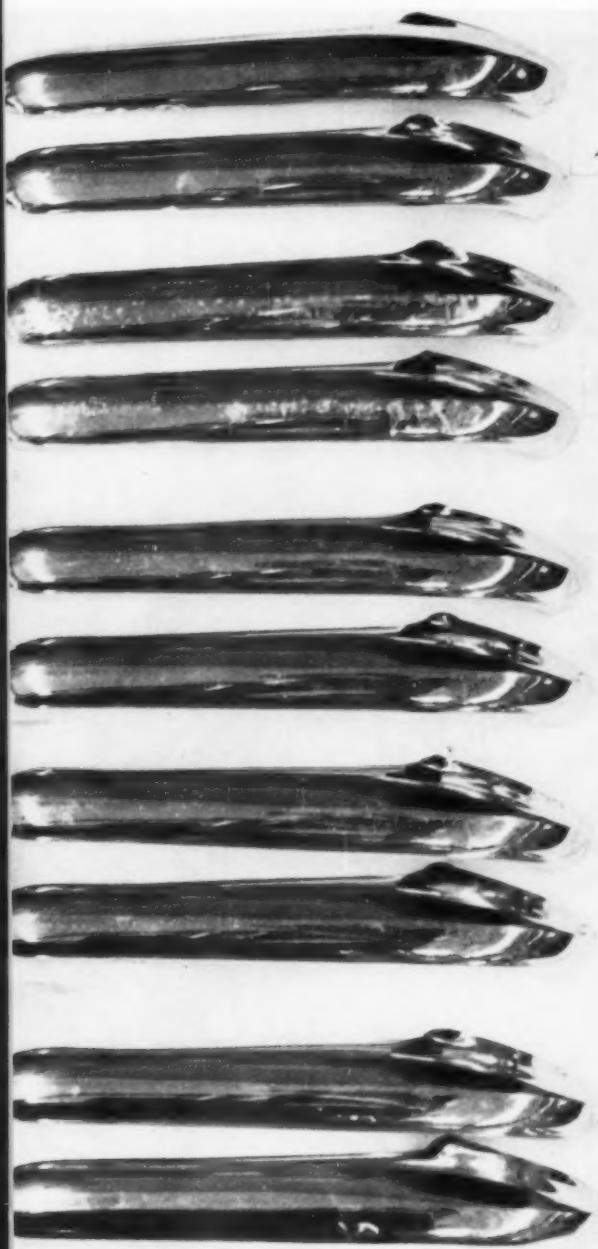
Corrosion Tests on Bright-Plated Zinc Die Castings Using Double Nickel
